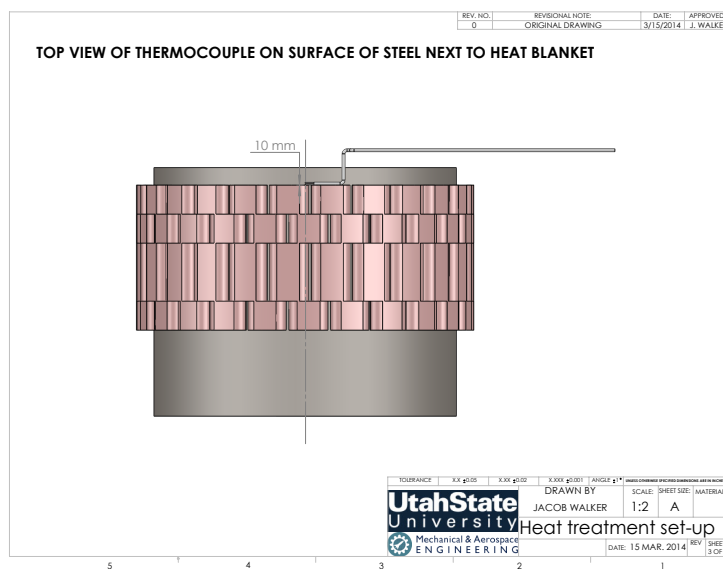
Drawings of Heat-Treatment Set-Up; Page 3
